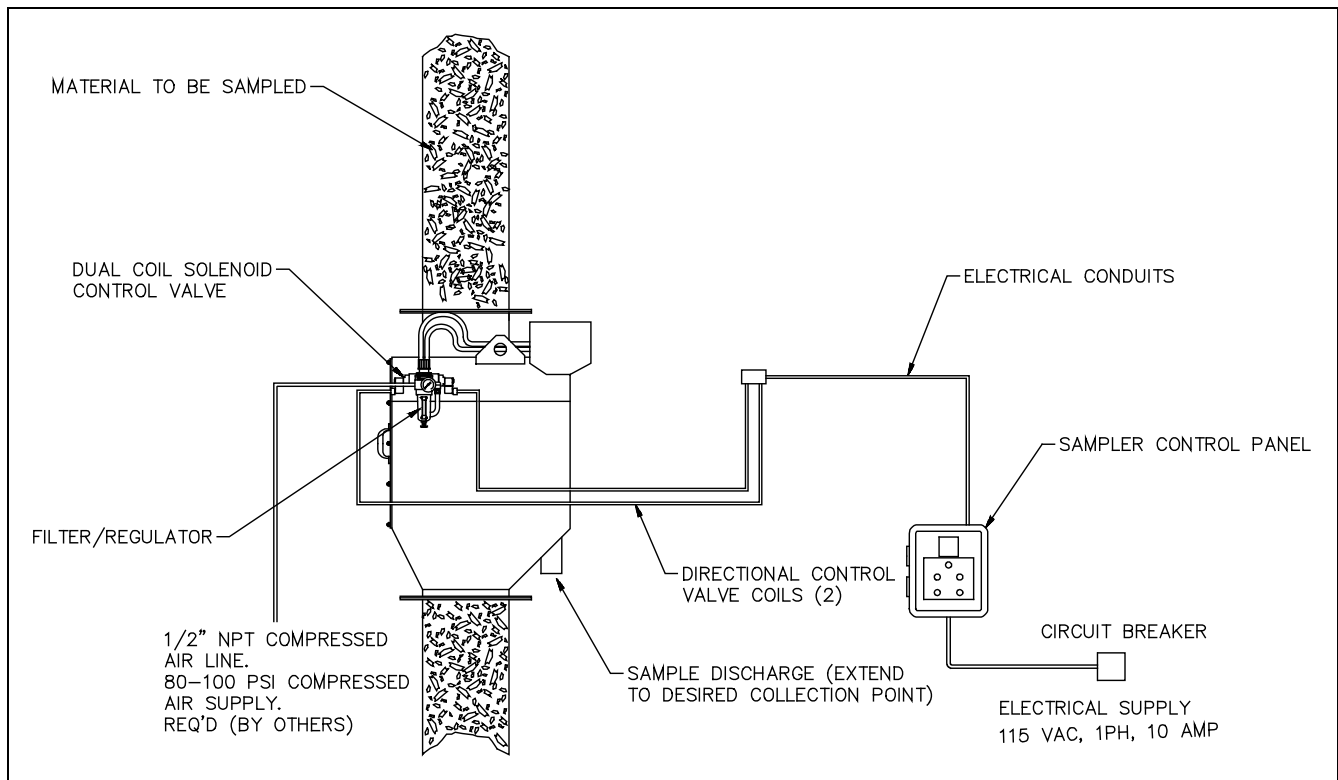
, TYPICAL INSTALLATION, MODEL GRA SAMPLING SYSTEM
